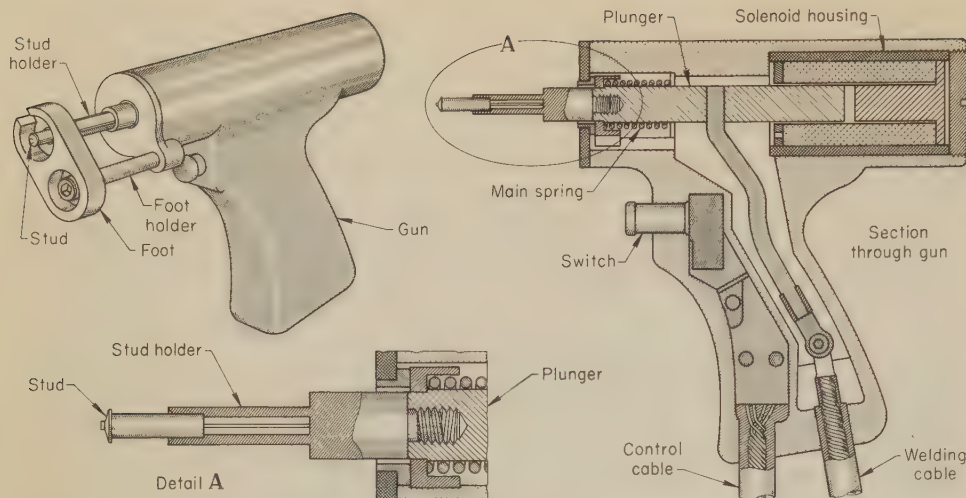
Gun for capacitor-discharge stud welding. Arc stud welding guns are similar but have a ferrule holder in the foot.
